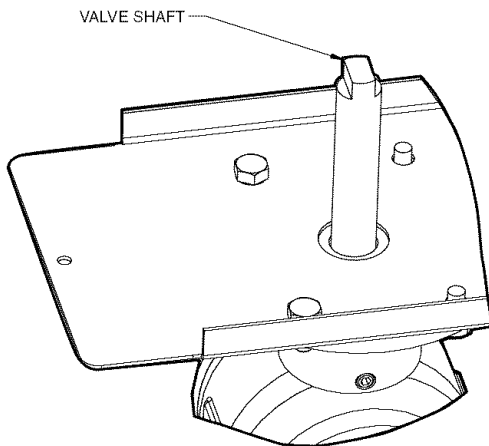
Fully Open Ball Valve with Actuator Removed
